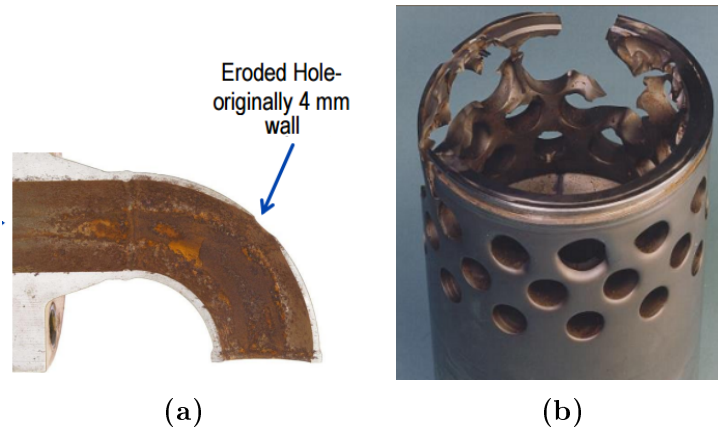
Sand erosion damage in pipeline bends and a choke valve [Peters, 2014]. (a) Sand erosion in a 50 mm pipeline bend. (b) Sand erosion in a choke valve part.
